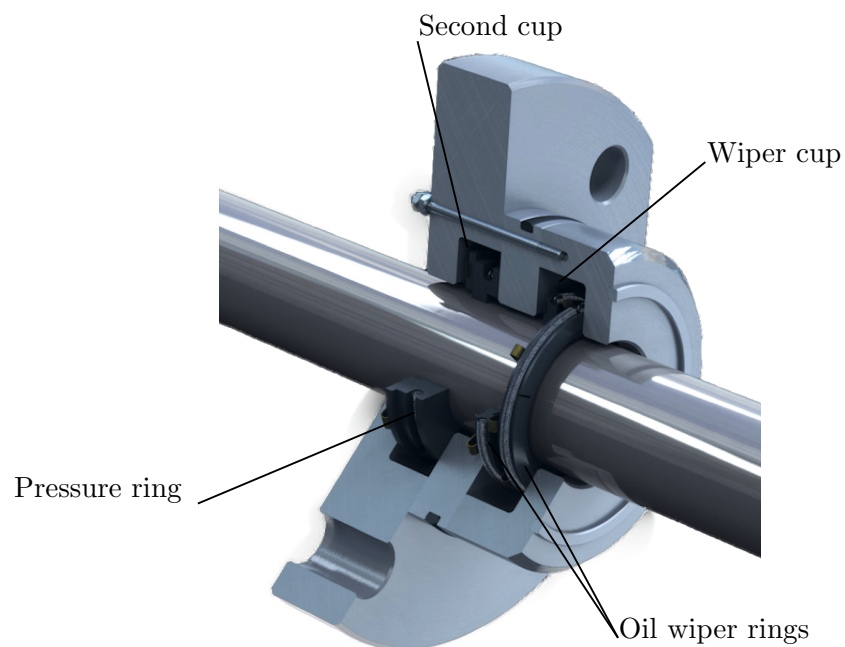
Detail of a wiper packing with the wiper cup, containing the wiper packing [9]
